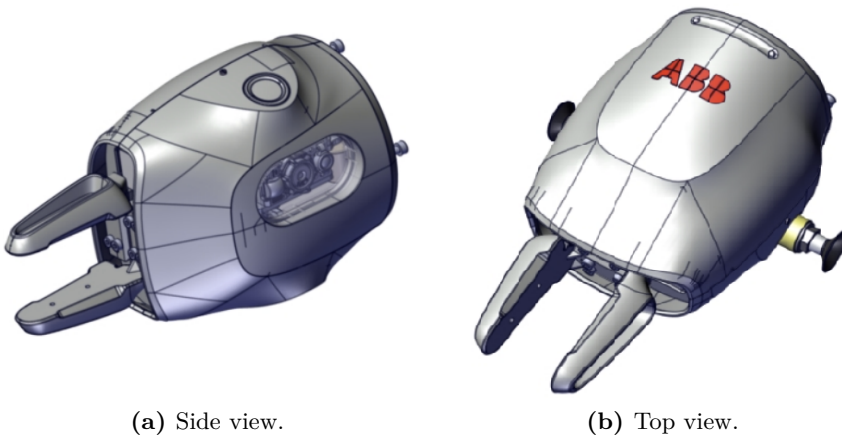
CAD drawing of a smart gripper equipped with the vision module and two suction modules.
